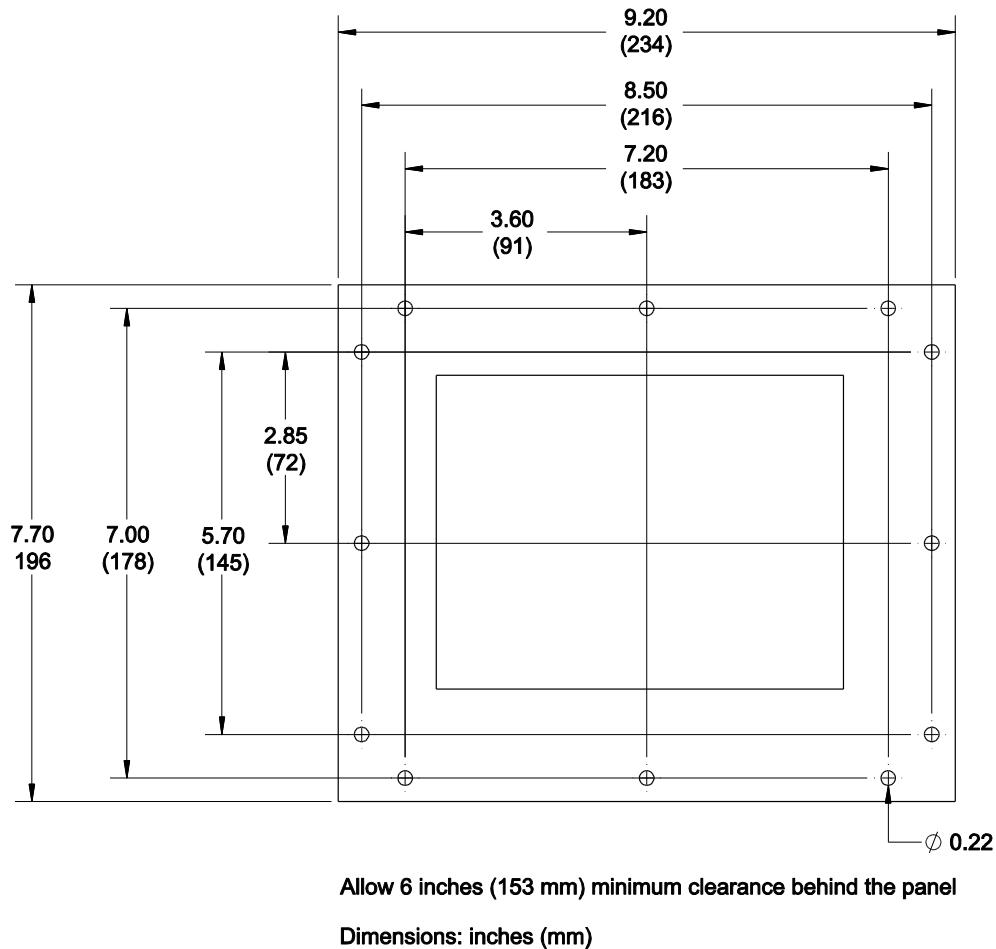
SMI 2 Panel Mount: Mounting Dimensions
